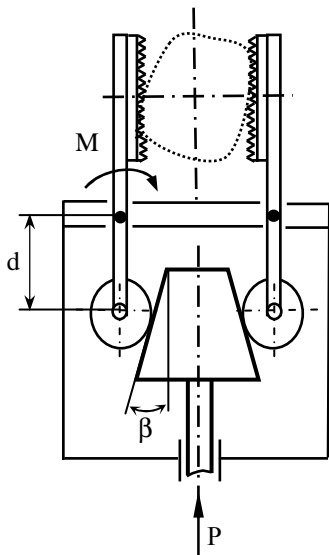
Scheme of gripper which is driven by wedge mechanism.
